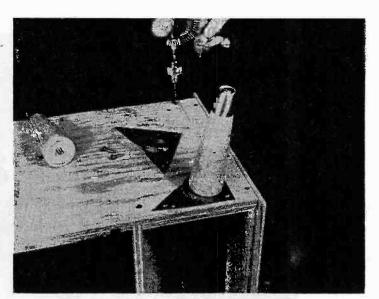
The leg brackets require sturdy screws, which will be a lot easier to drive if you drill small pilot holes.
